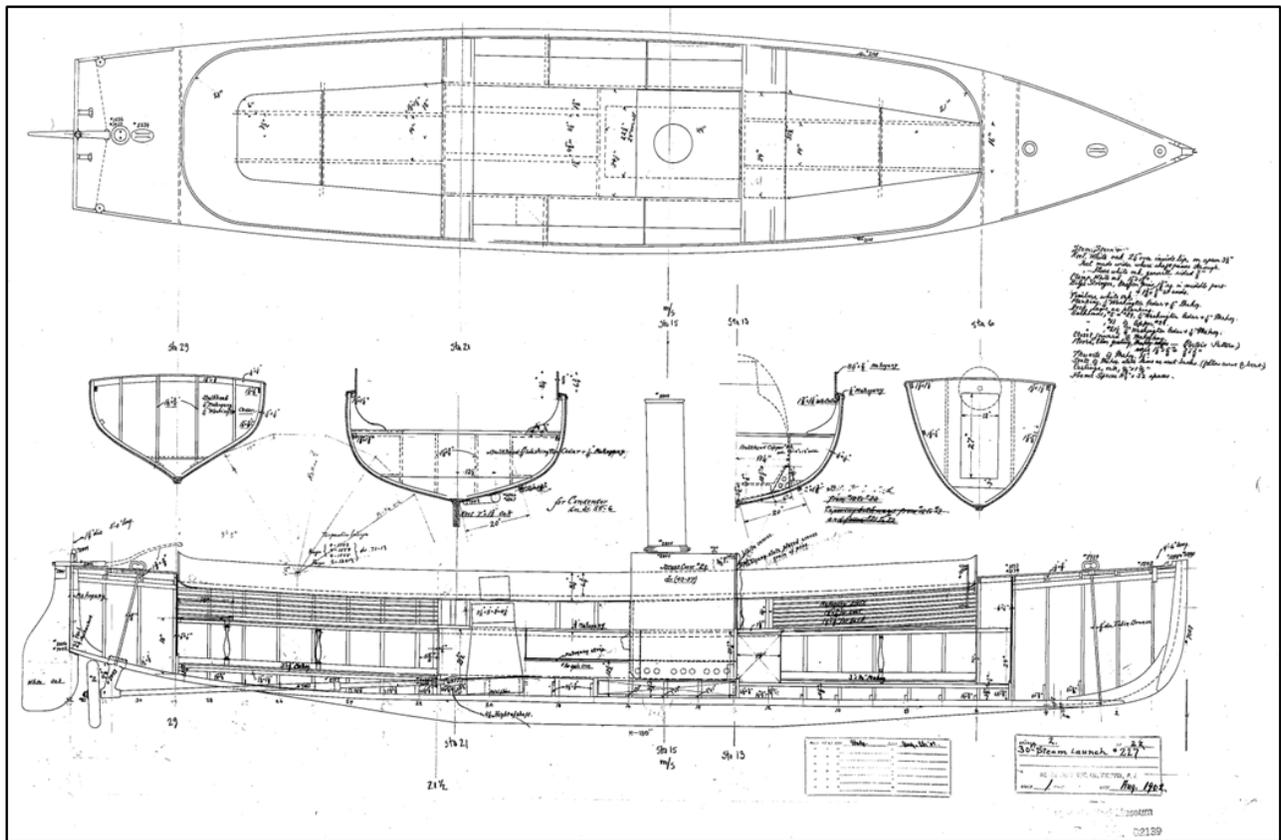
The info box in the lower right corner reads in part, “30 ft Steam Launch #227 Herreshoff Mfg Co, Bristol, RI Aug 1902”. This is the only drawing we obtained specifically referring to #227. Courtesy of Kurt Hasselbalch, MIT Museum.
